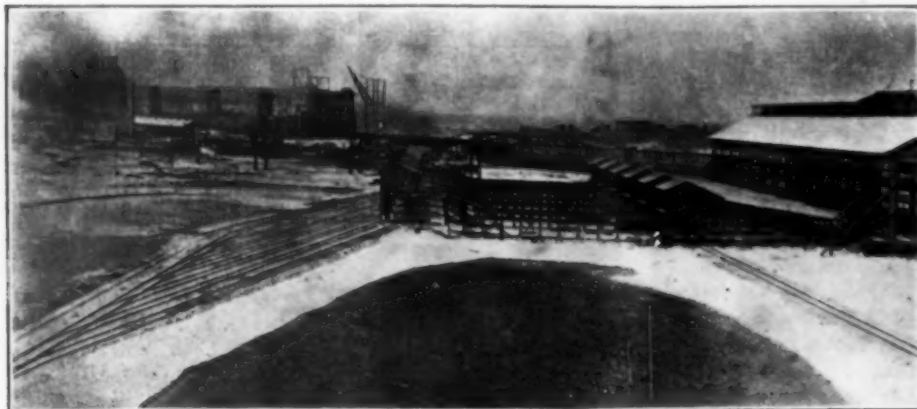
GROUP OF UEHLING TYPE MACHINES
